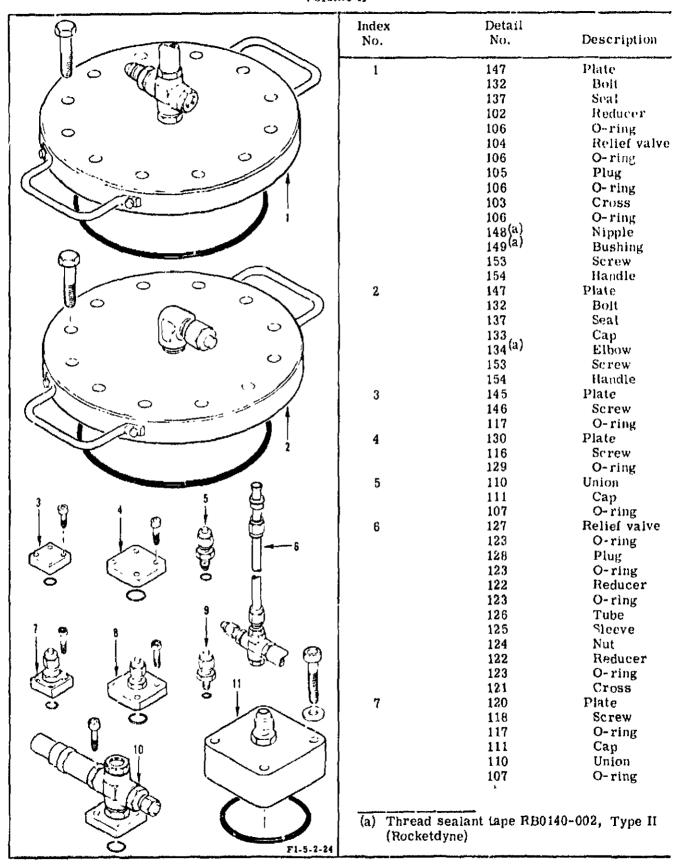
Pressure Test Fixture T-5029362 (Sheet 1 of 2)
